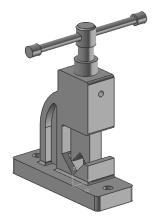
Completed Pipe Vice assembly after assembling the left side Handle Stop
